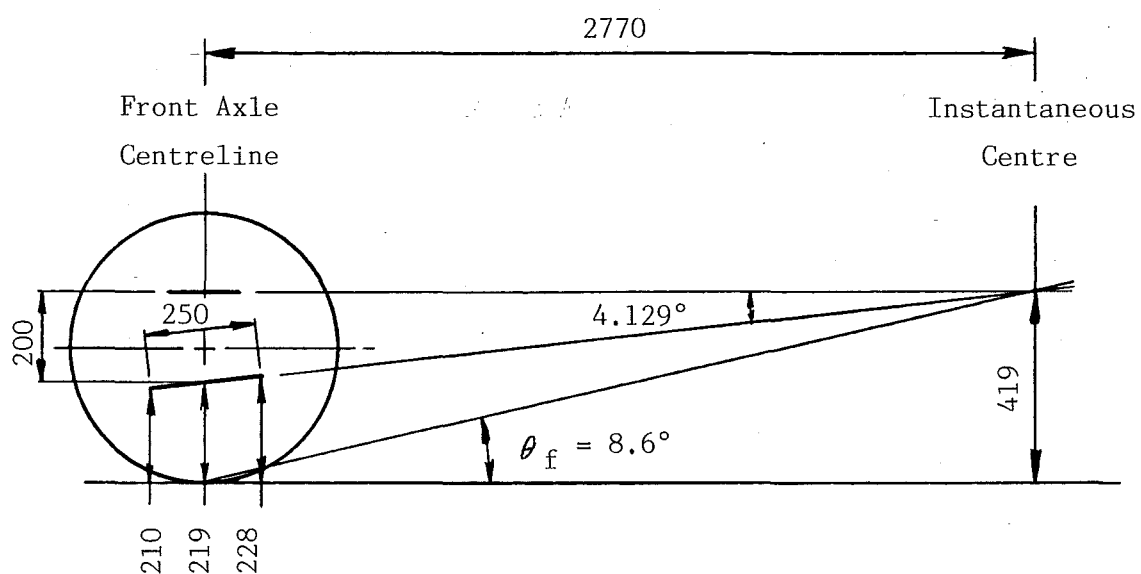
As Built Front Wishbone Side Elevation Geometry.
